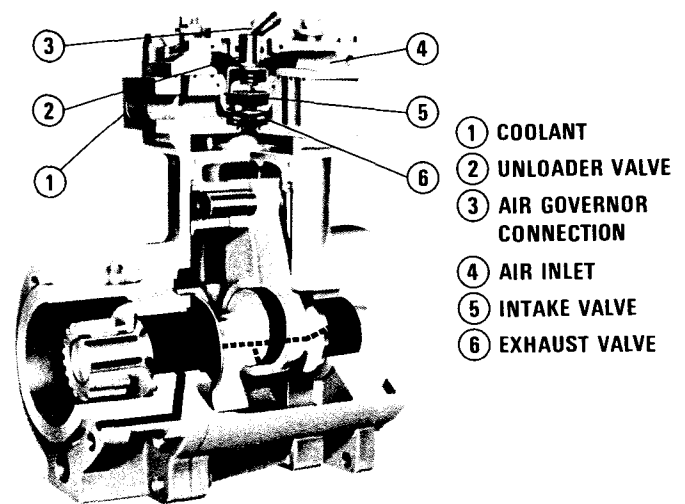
, (AWC-10). Cummins air compressor (single cylinder)
